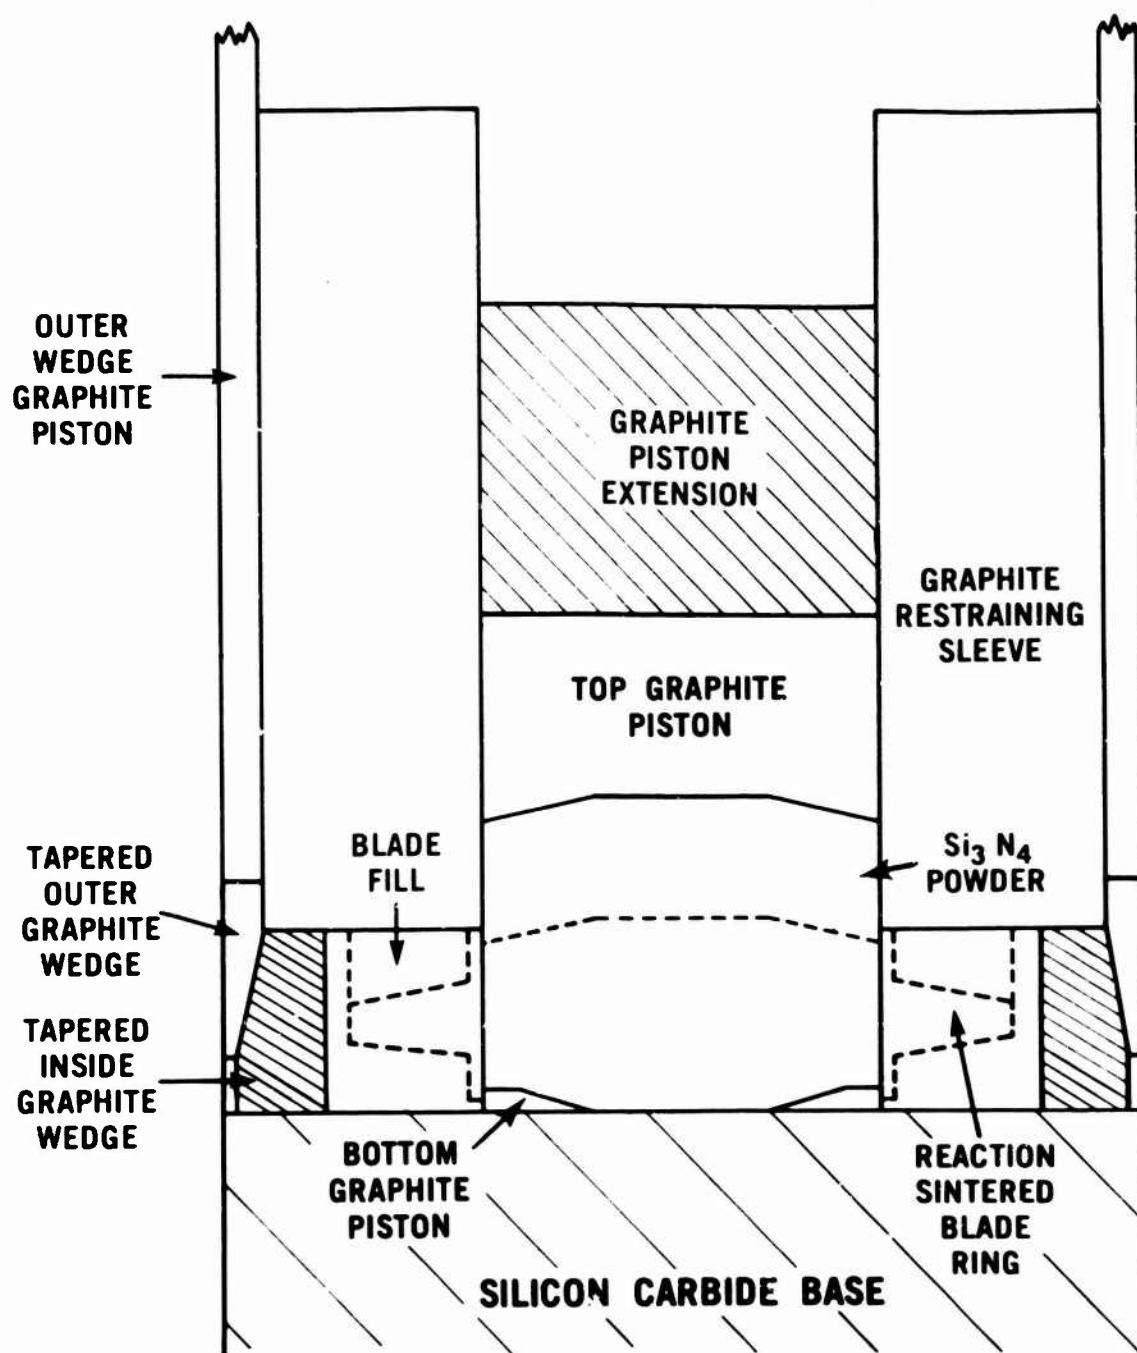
Hot Press Bonding Assembly — Simplified Two Piece-Duo-Density Rotor Concept
